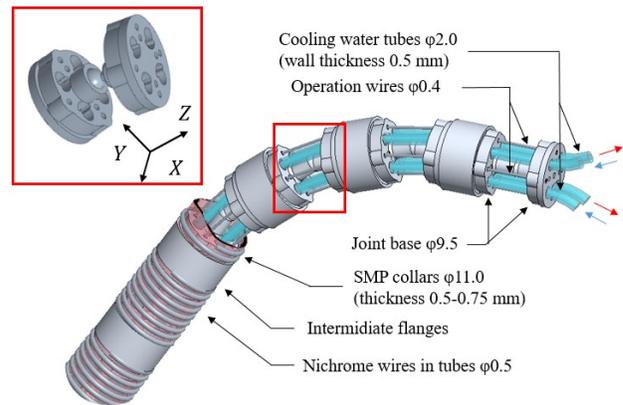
Flexible joint details. The flexible joint consists of ball joints, operation wires, SMP collars, intermediate flanges, nichrome wires, power supply to nichrome wires, and cooling water tubes.
